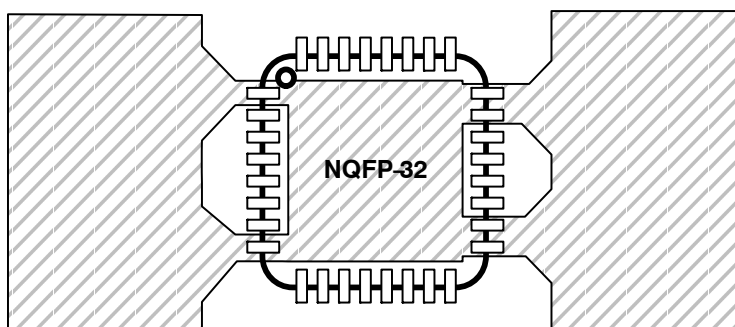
Example of NQFP-32 PCB Ground Plane Layout in Top View (Preferred Layout at Top and Bottom)
